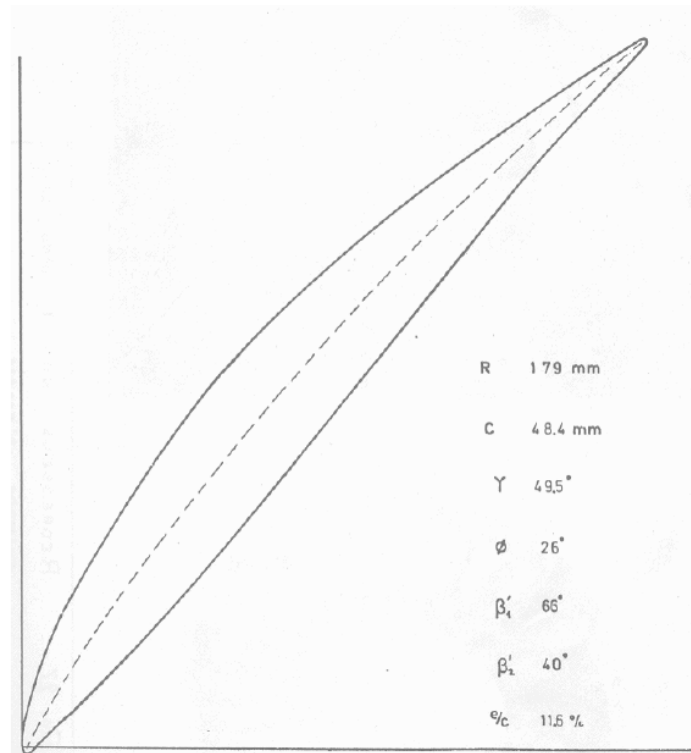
The R-2 compressor rotor blade (NACA 65 type).
